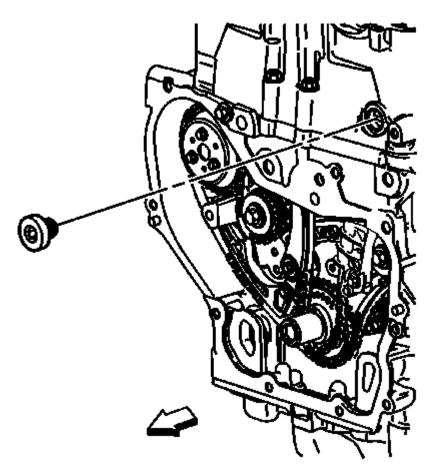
Fixed Timing Chain Guide Access Plug Courtesy of GENERAL MOTORS COMPANY
